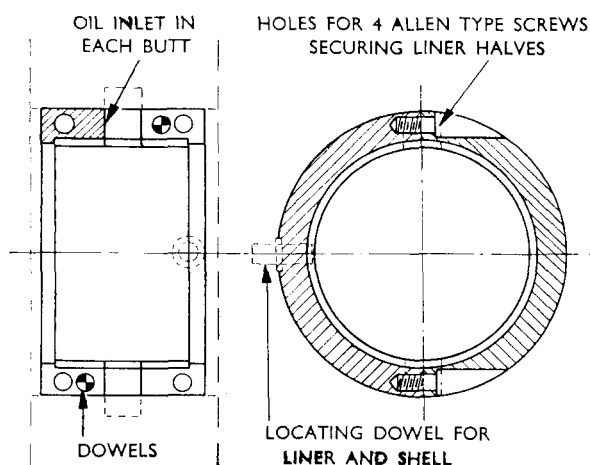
Y.100 Mk. II—ARRANGEMENT OF JOURNAL BEARING
